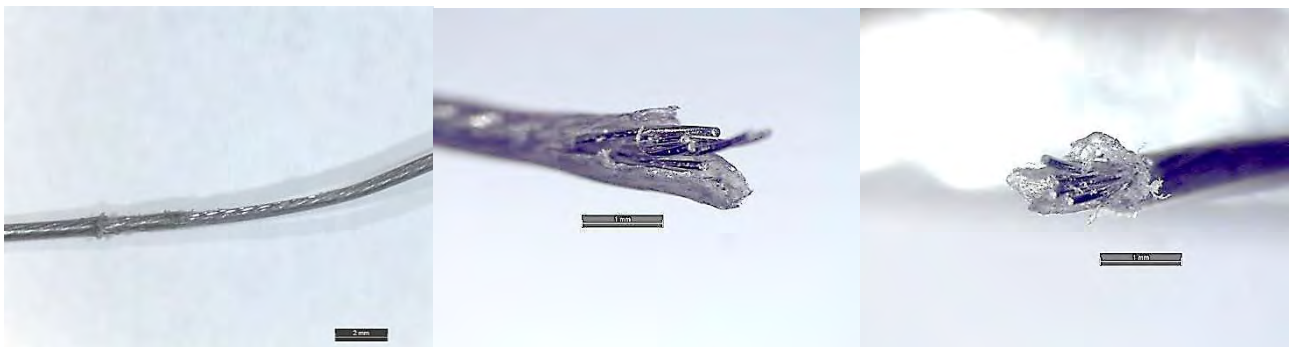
Specimen 4: Lateral view of the surface wear on the actuating cable at the interface with the distal interphalangeal channel ring (left), with perspective views of the proximal and distal fracture surfaces of the failed cable (centre & right resp.).
